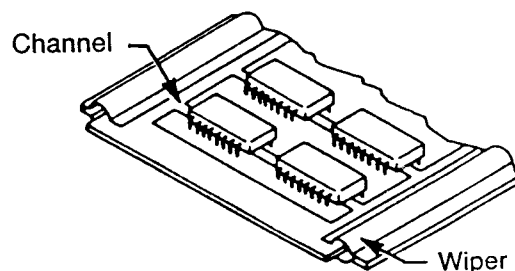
Channel/wiper Heat Sinking on Double Layer Board
